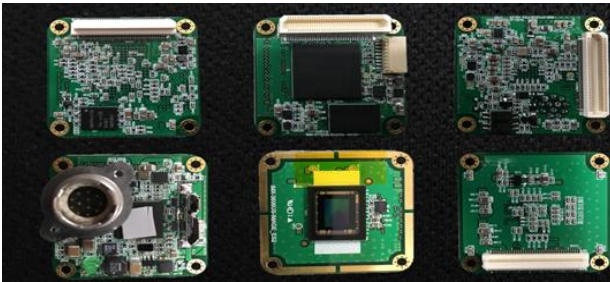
PCB Image of Small 360° Oral Scanner Embedded Board.
